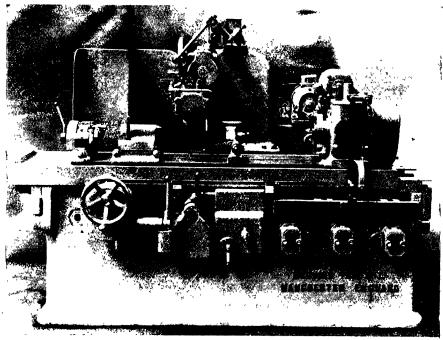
CHURCHILL SPLINE-SHAFT GRINDING MACHINE
